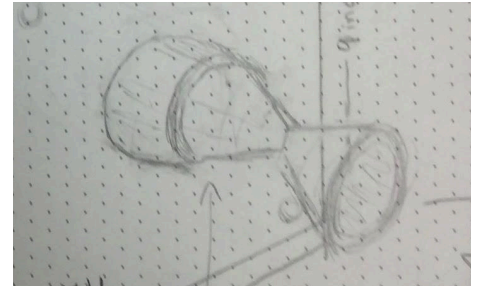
Preliminary Sketch of the Nozzle. Above is the first concept of the nozzle. It consists of one steel piece with converging and diverging cones.
